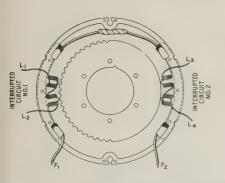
Cross section of stator and rotor assembly, showing arrangement of teeth and windings of inductor alternator for generating 1,000/20-cycle tone directly
